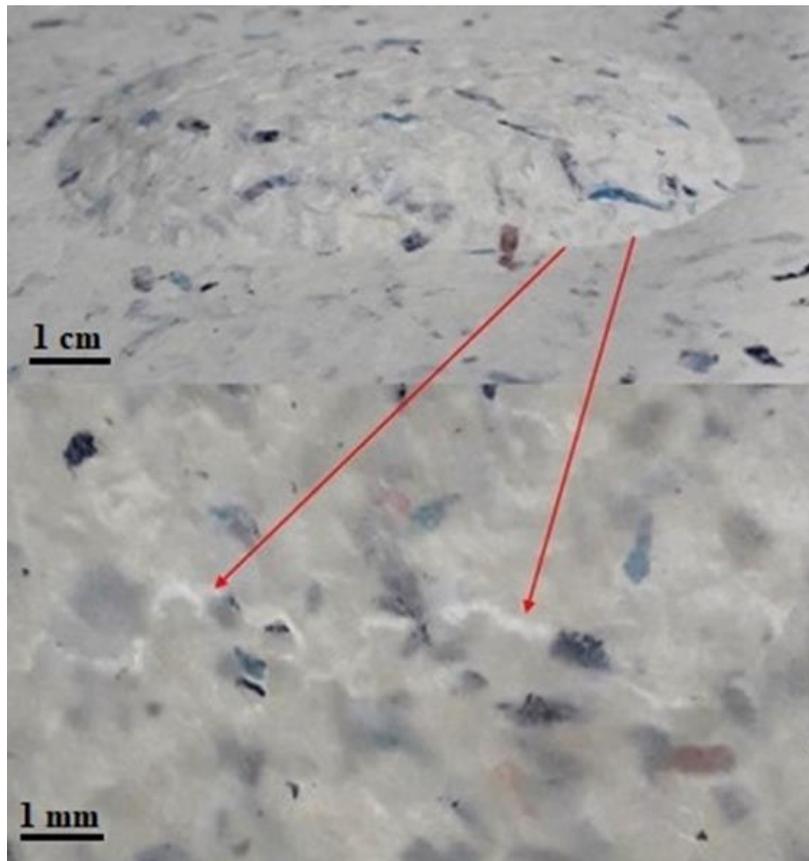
Defects in flange region of a molded pulp sample (top), the defects are highlighted with arrows in an enlarged section (bottom) of the same sample
